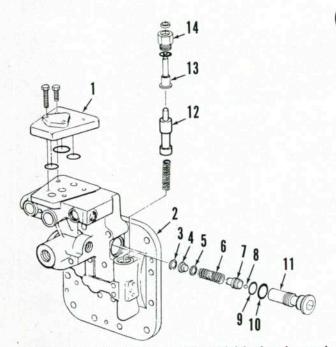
Exploded view of differential lock valve and hydraulic system pressure relief valve.
